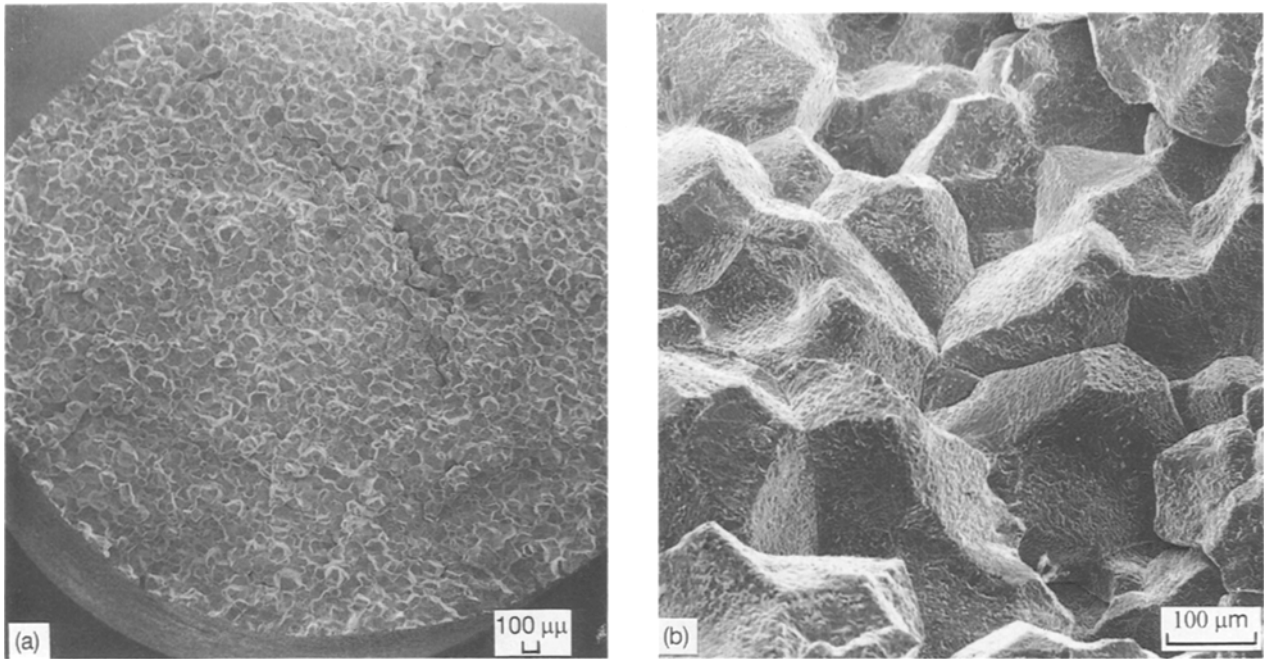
SEM fractograph of fracture surface of Gleebly hot ductility test specimen.
